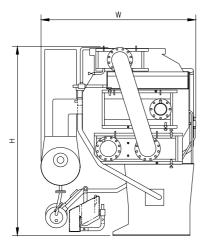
Assembly drawing(AR-W900~1650G2)
